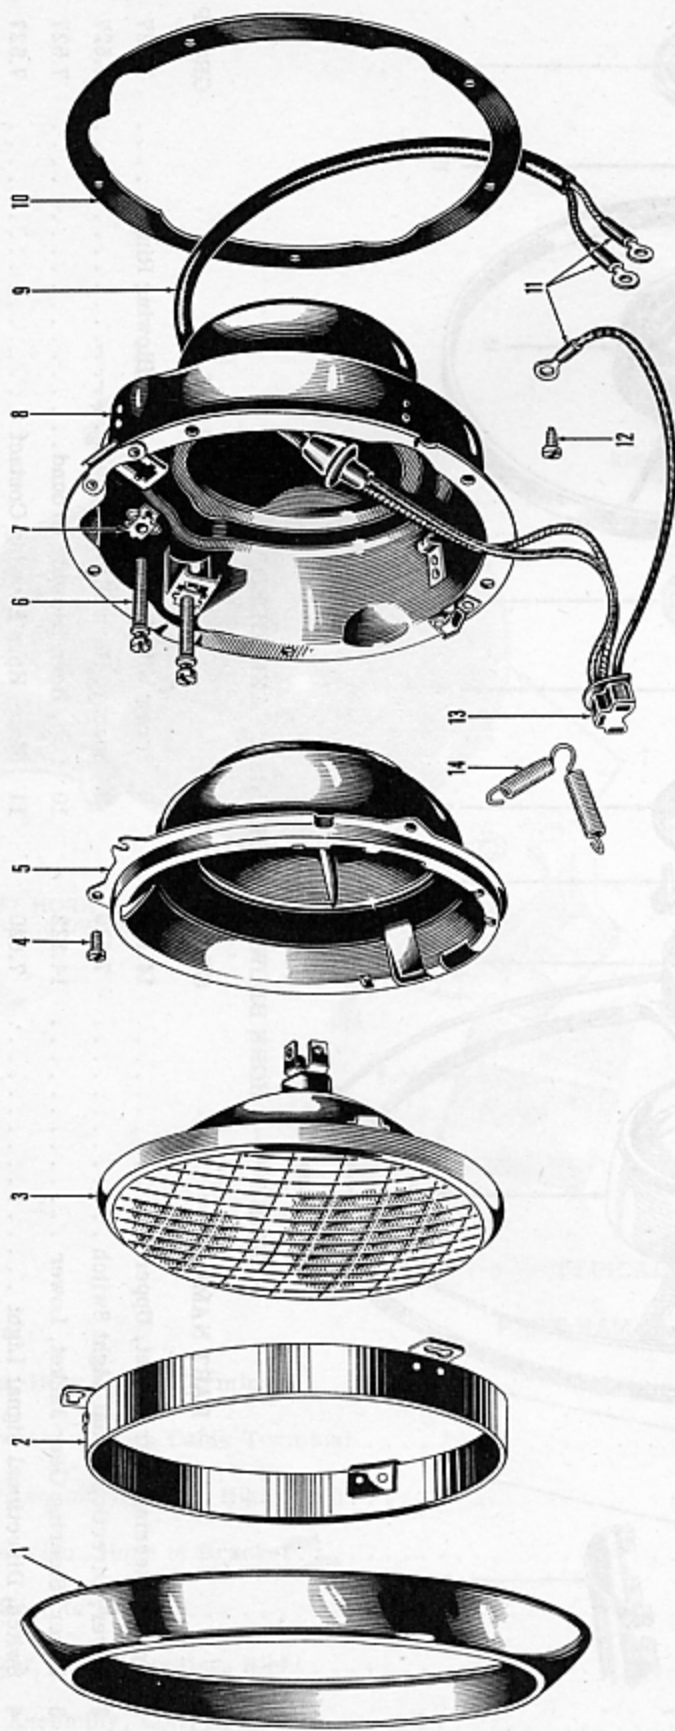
TYPICAL HEADLIGHT - EXPLODED VIEW
